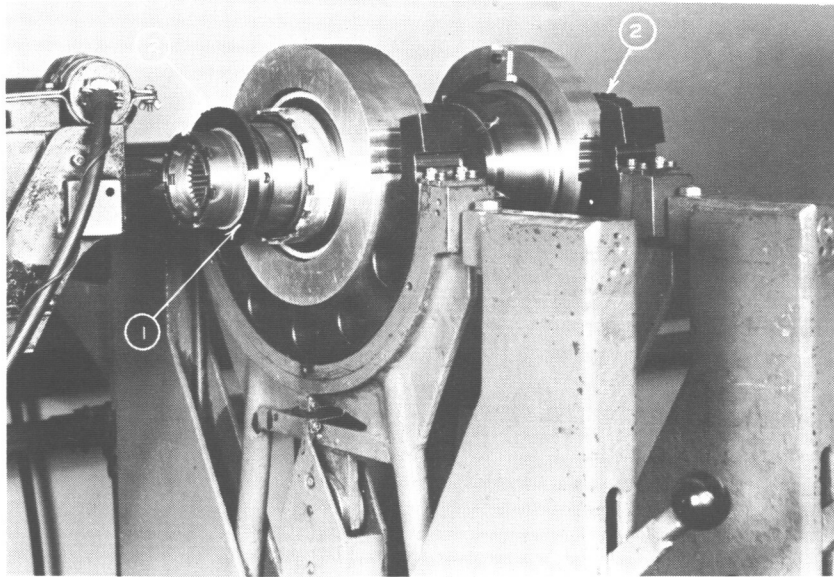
Mainshaft Seal Rig 29360 - Shaft Assembly in Gisholt Dynetric Balance Machine Supports During Balance Operation.
